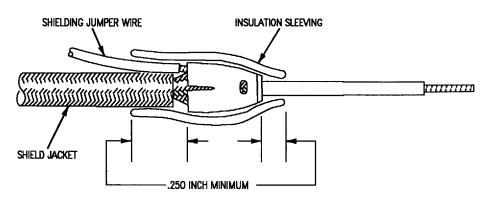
Crimping Cable and Shielding Termination Ferrule Assembly
